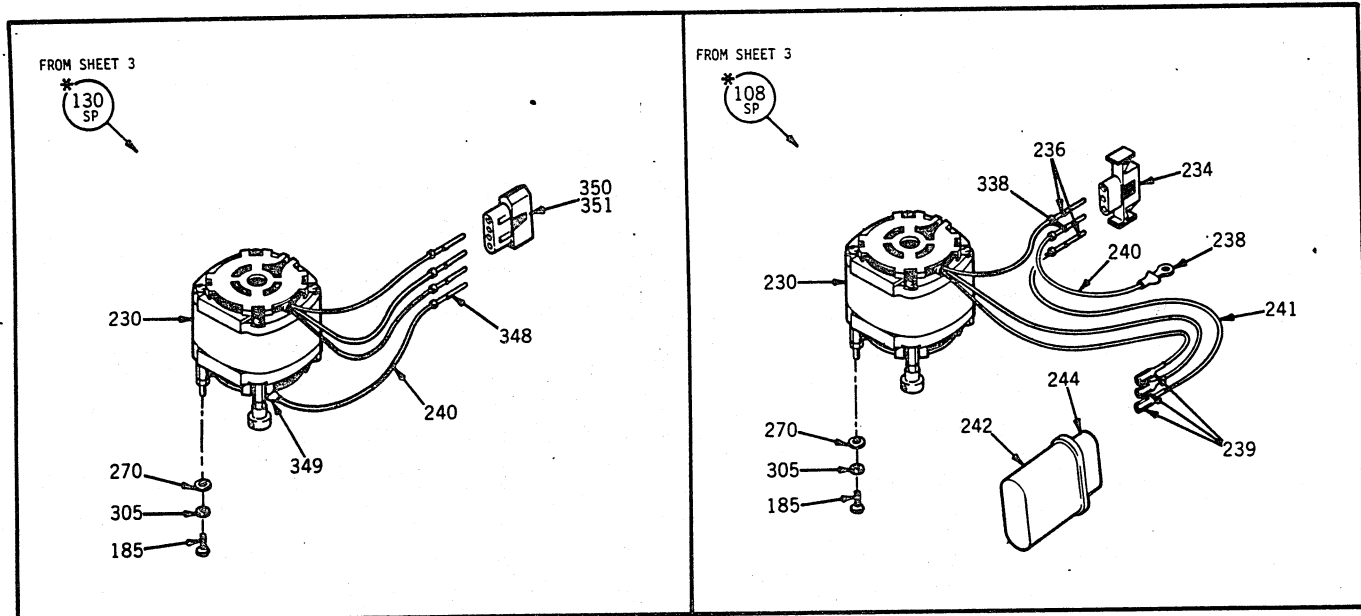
DRIVE MOTOR ASSEMBLY (SHEET 1 OF 2)
